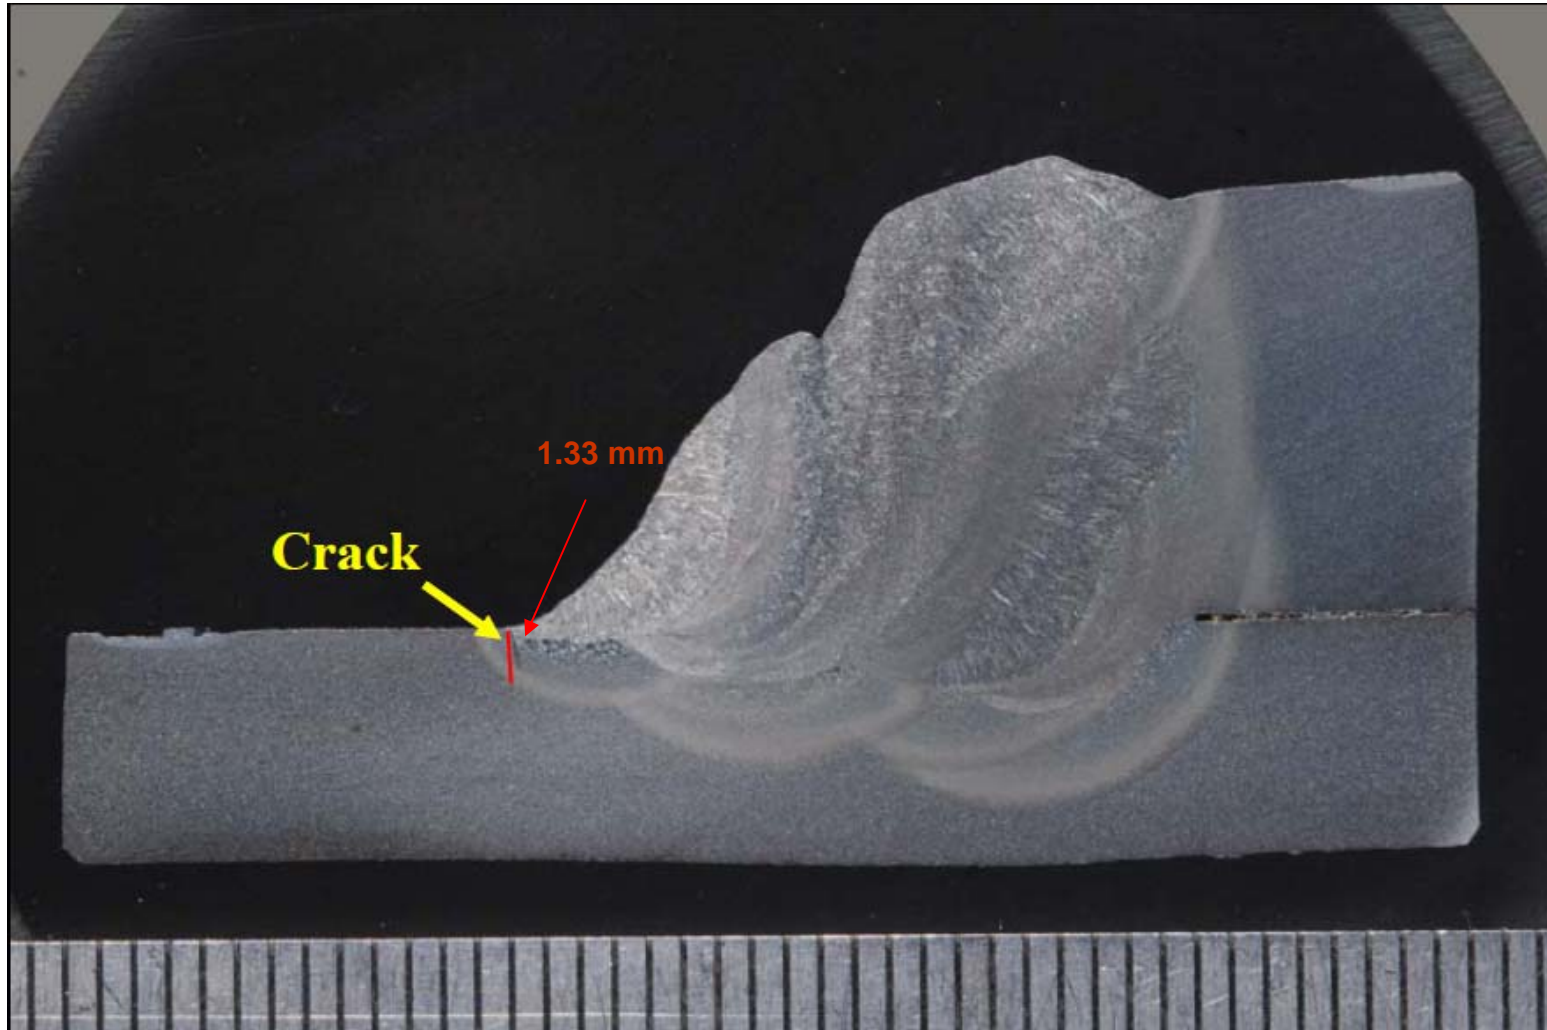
Detail of Fillet Weld Section and HAZ Depth at the 6:00 Position (upstream fillet weld)
